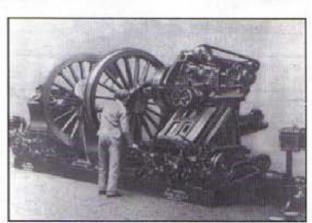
Churchill planetary grinder for crankpin holes on locomotive driving wheel assemblies, c.1927.
